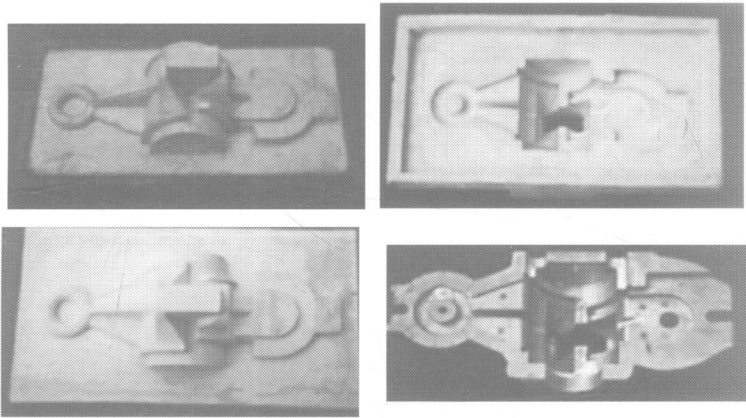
An aluminum alloy mould manufacturing process through transferring LOM prototype to silicon rubber mould.
